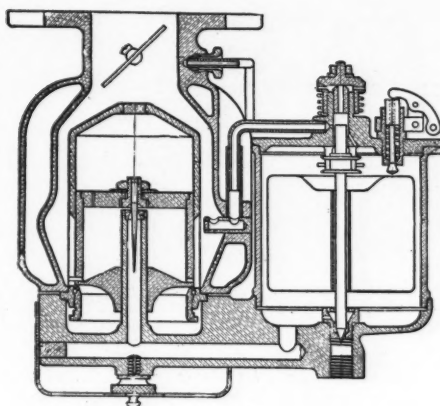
Sectional view of the Newcomb carburetor, showing the float adjustment
